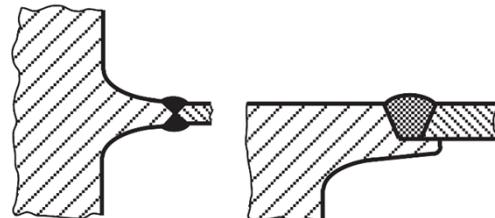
Welding flanges on steel castings or forgings
